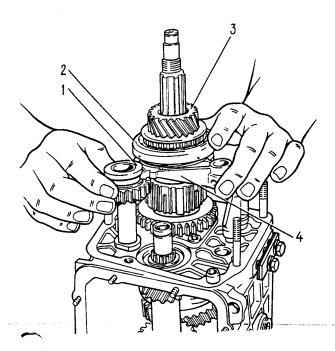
Removing Reverse Idler Gear and 5th Speed Gear Complete with Synchronizer and Fork: 1 - reverse idler gear; 2 - 5th speed shifter sleeve; 3 - 5th speed gear with synchronizer; 4 - 5th speed and reverse shift fork
